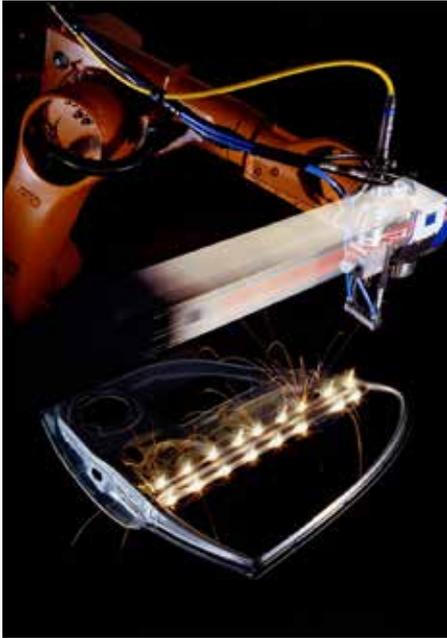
Welding "on-the-fly". The robot does not stop during welding. Motion controller of robot and scanning optics are fully synchronised to produce the programmed welding patterns, even if the robot path and/or velocity changes
